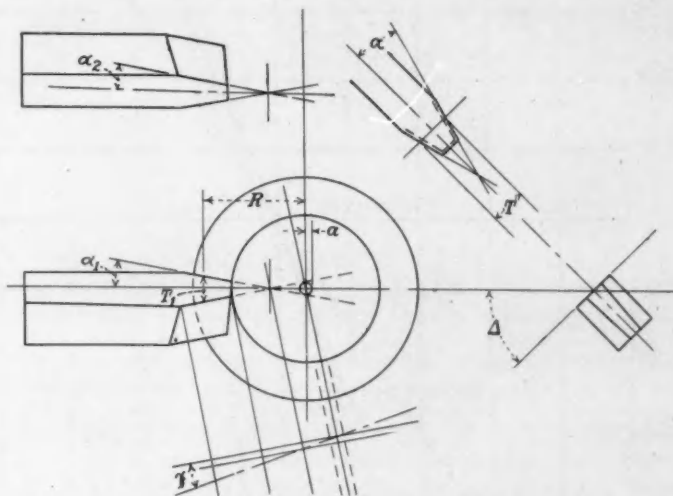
FLAT-TOPPED TOOL TIPPED TO THE HELIX ANGLE OF THE SCREW-THREAD
